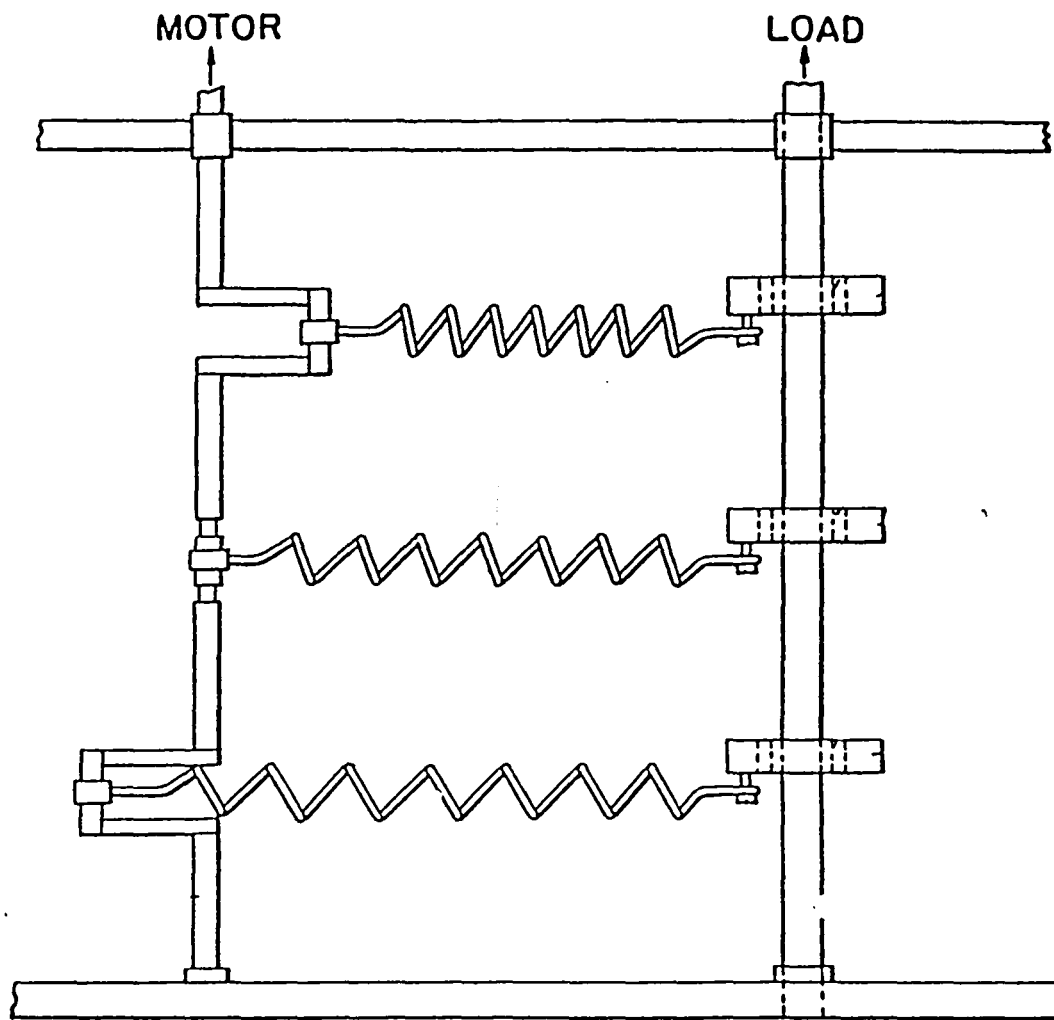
Schematic drawing of the off-axis version of Amjadi torque convertor, showing the basic components.
